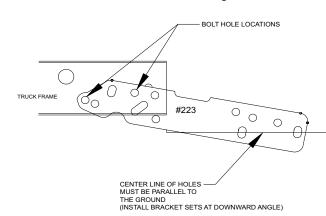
(driver side view) 1967-72 F/S TRUCK (34 INCH FRAME) FIGURE 2 (driver side view) 1967-72 F/S TRUCK (34 INCH FRAME)
